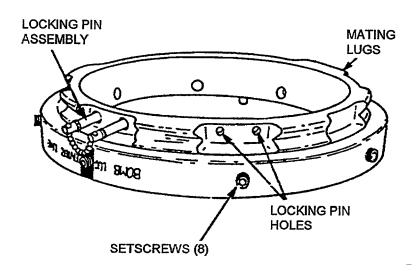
B. Bomb Fin Adapter ADU-320A/B
